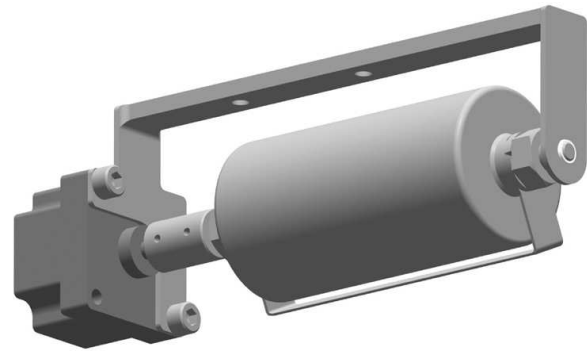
3D CAD model of the lasagna pasta gripper.
